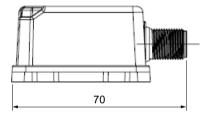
Dimension drawing for RF310R Dimensions in mm
